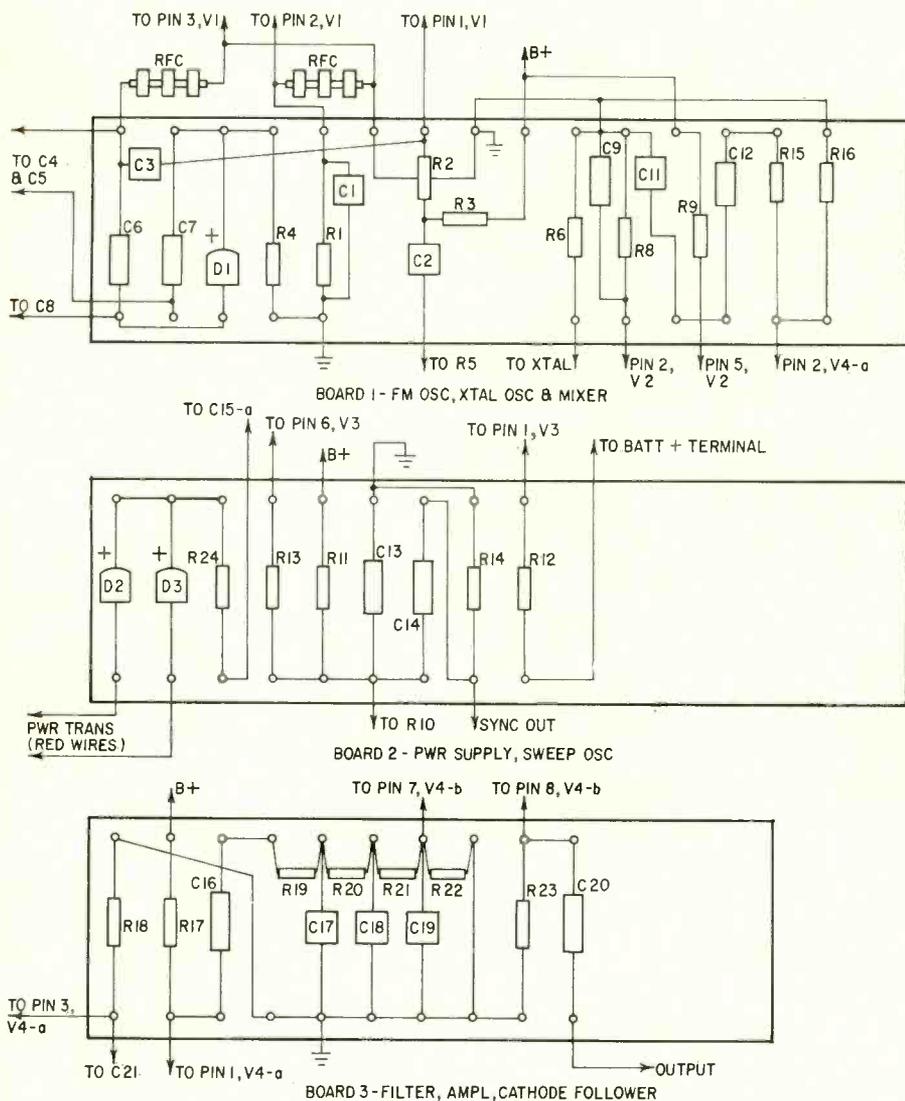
Terminal boards make wiring neater and troubleshooting easier. Here are the three board layouts for the generator. Parts not shown on these boards are chassis-mounted or wired point-to-point.
